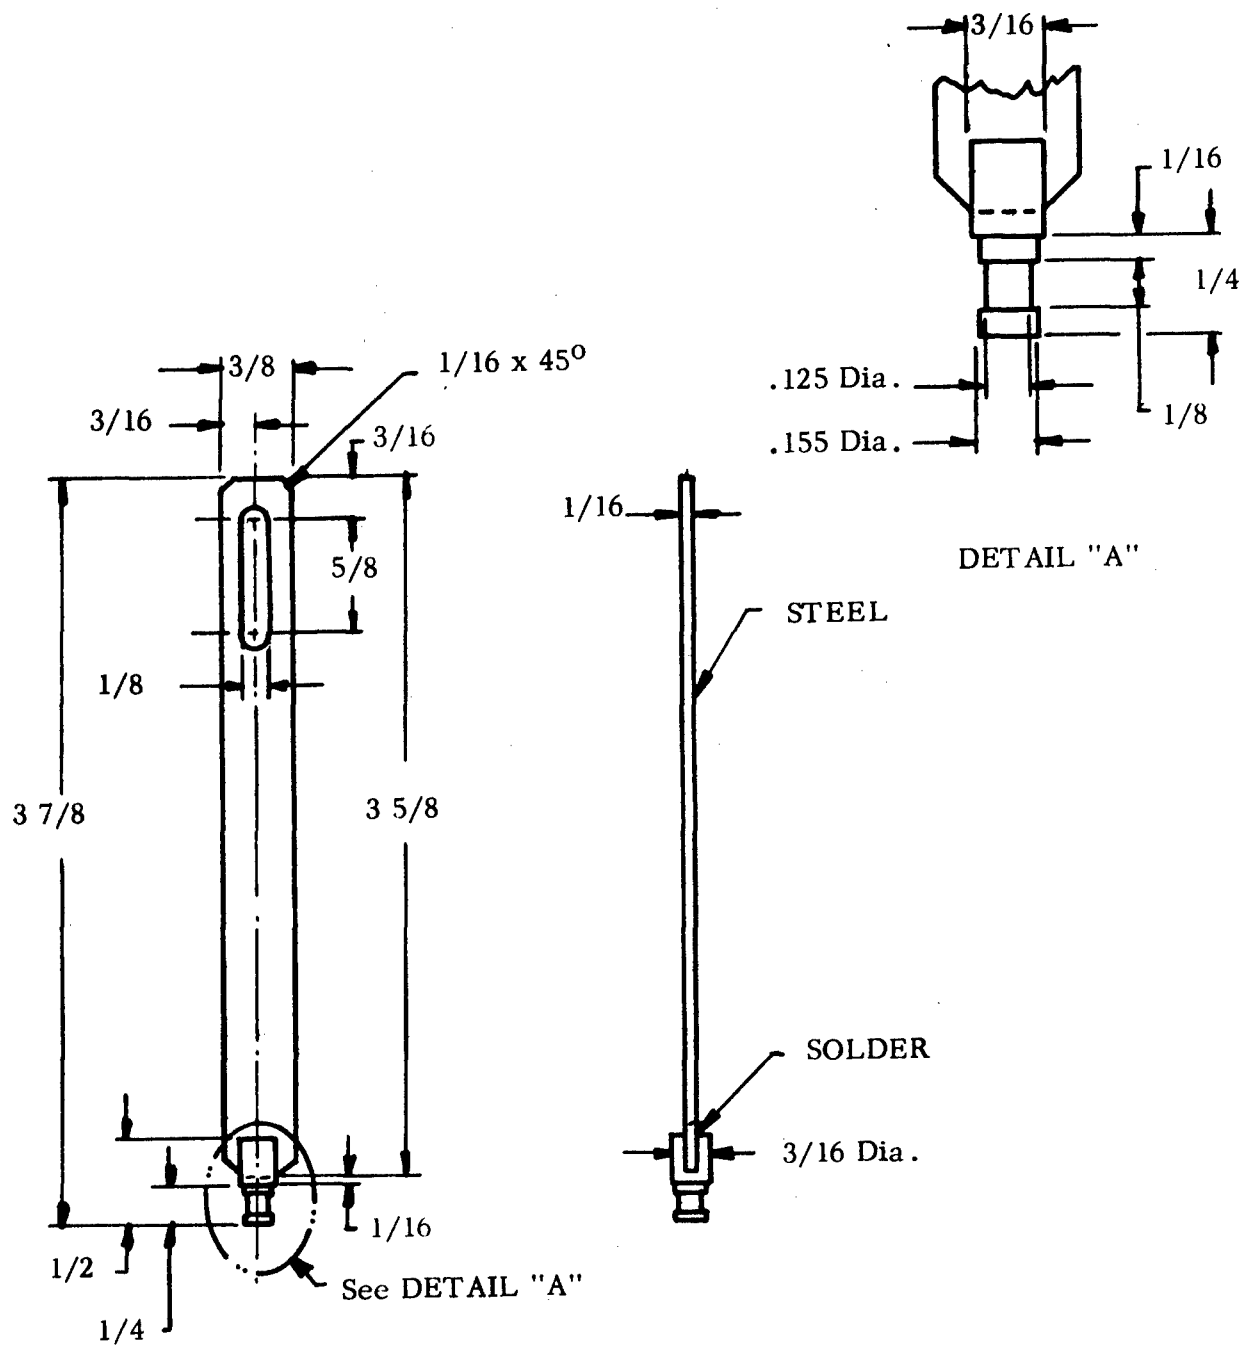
C. PLAN AND ELEVATION VIEW OF BITE BAR BRACKET
